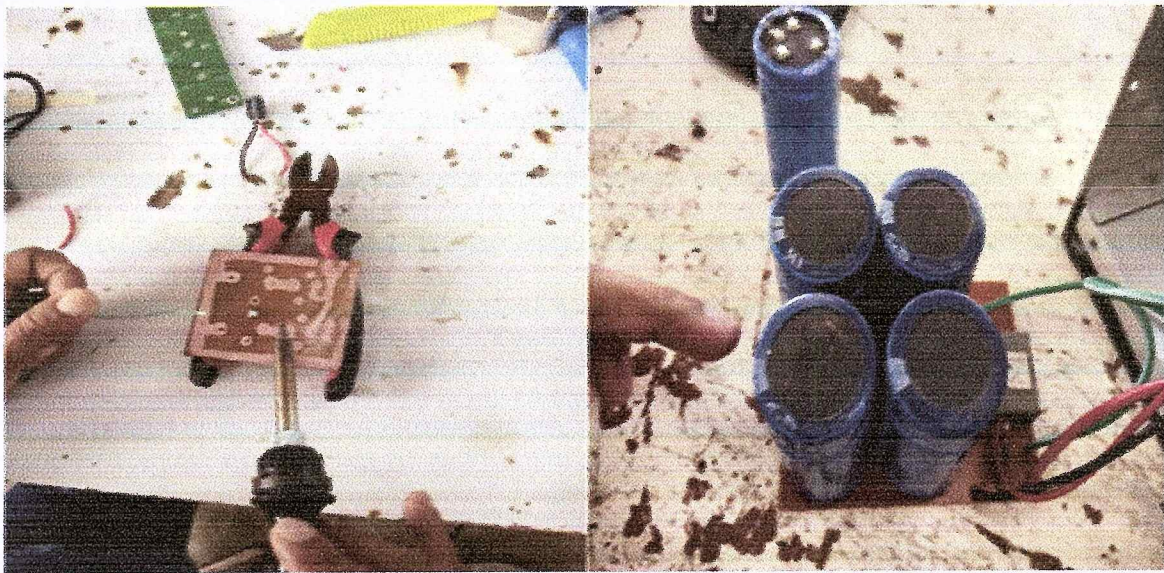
Printed Circuit Board Soldering and Positioning the Electrolytic Capacitor
